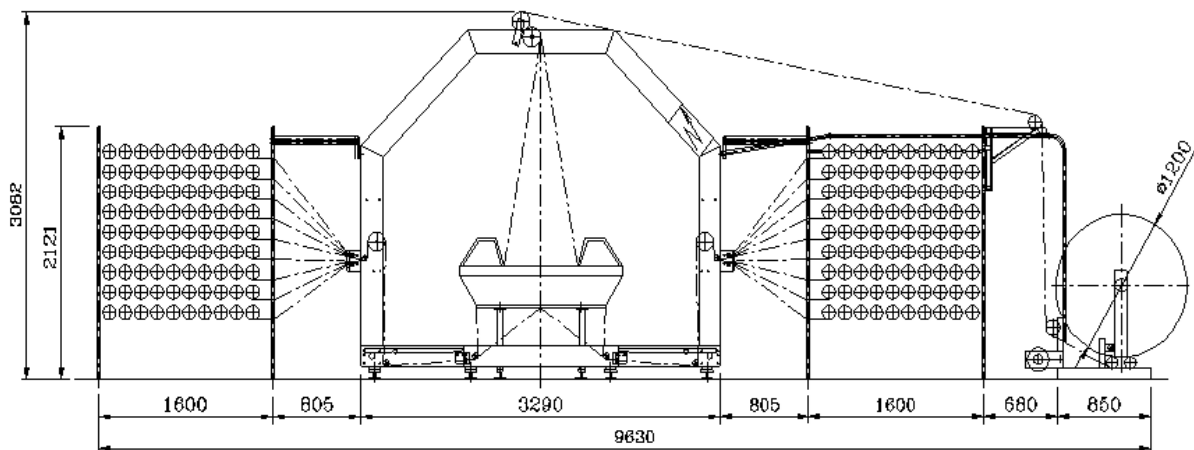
CREEL STAND UNIT, 2) MAIN FRAME UNIT (WEAVING RING, REED RING) TAKE OFF UNIT, 4) FABRIC WINDER UNI
